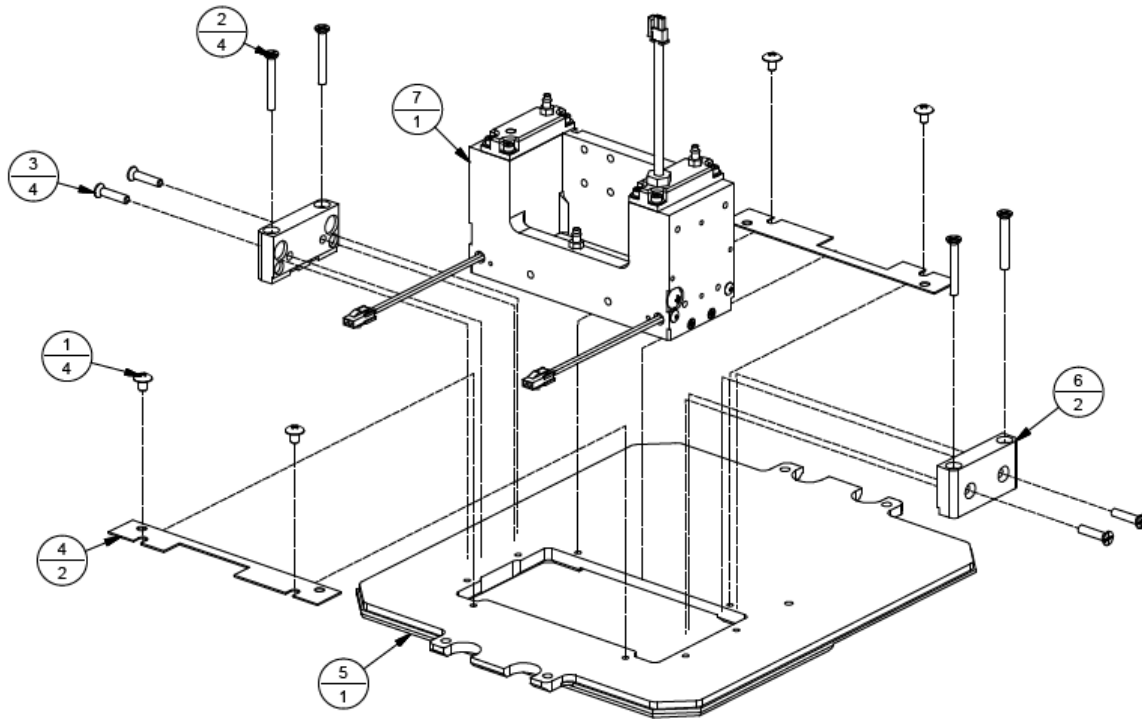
9107437A – Bottom Plate Assembly, Atom 2500
